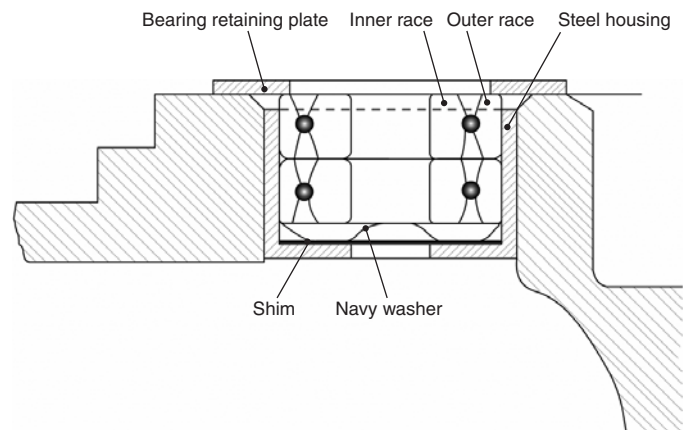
Schematic of the torque sensor bearing assembly
